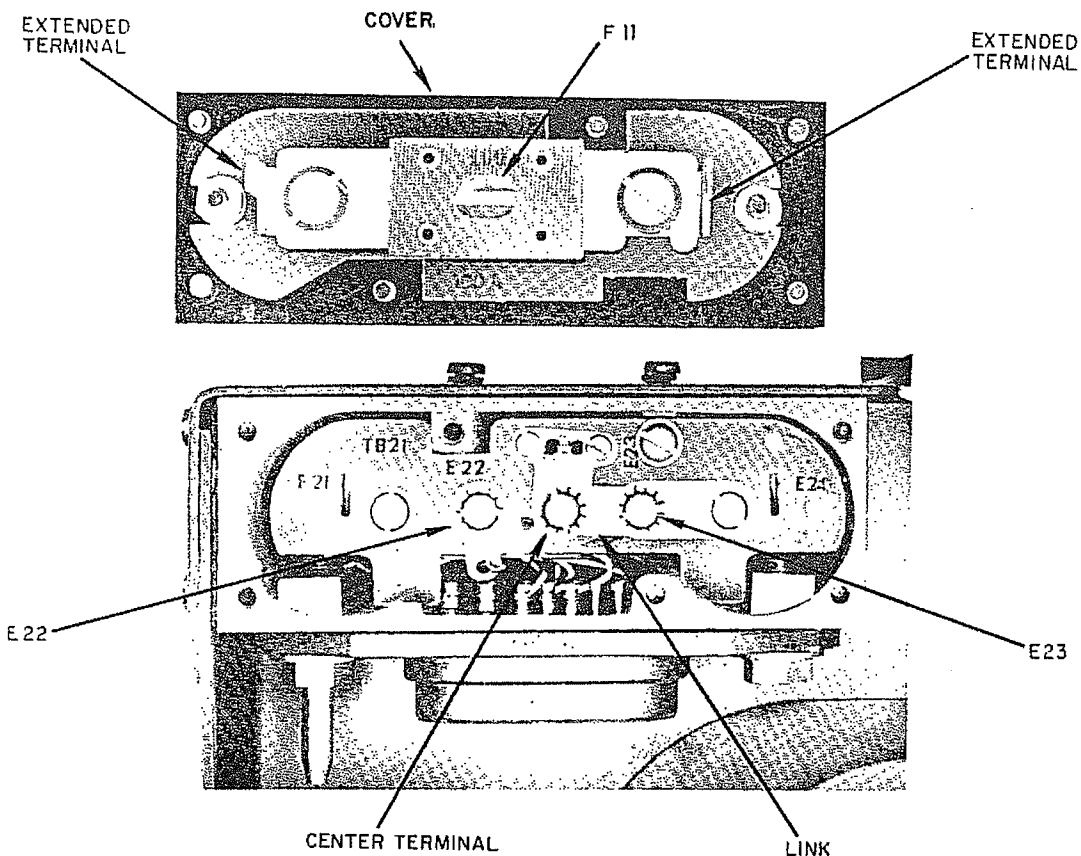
Inside View of Junction Box on Mounting MT-1029/VRC
